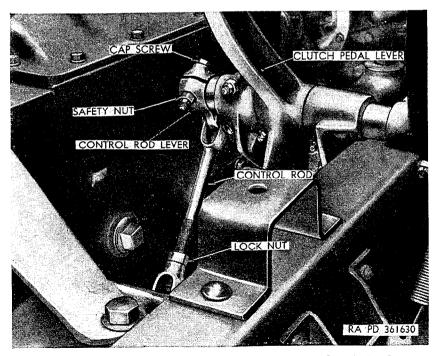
Left front view of clutch pedal lever and control rod. 347797°—55——14
